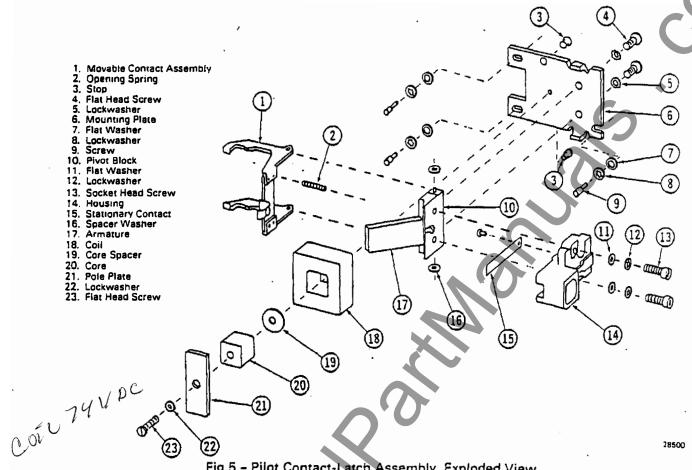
Pilot Contact-Latch Assembly, Exploded View
